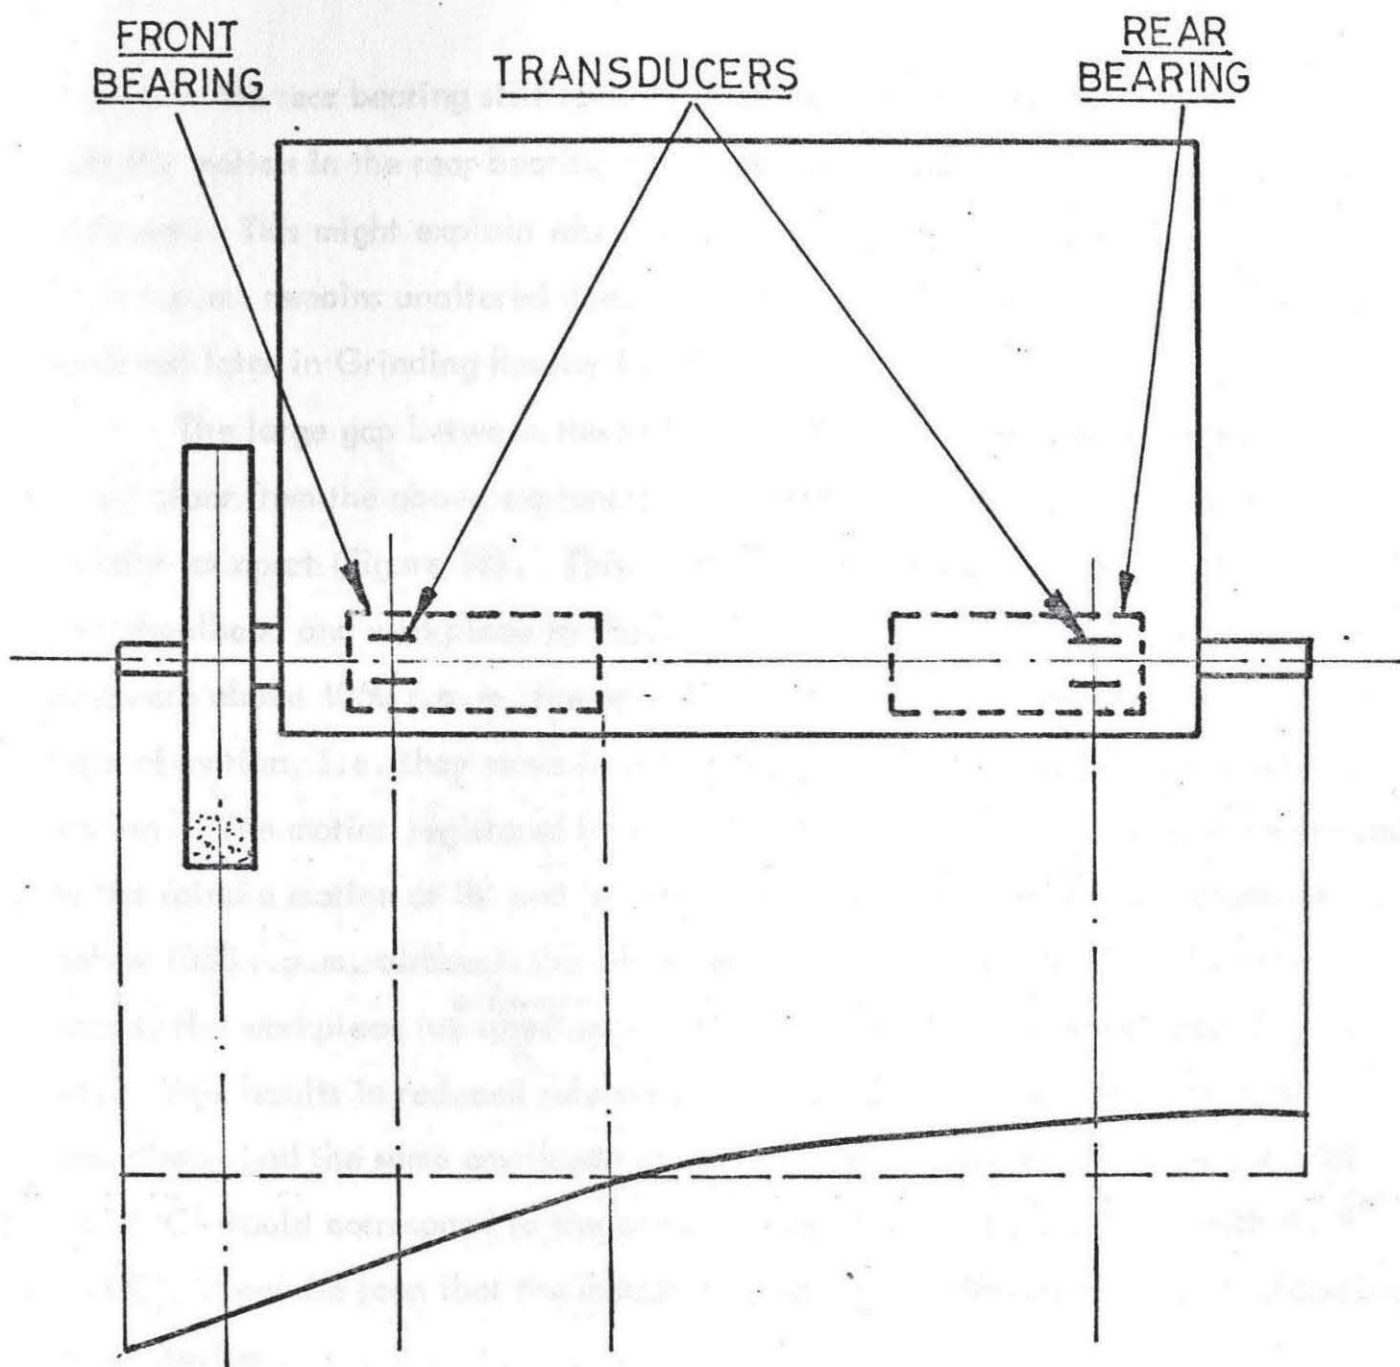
WHEEL SPINDLE POSITION INSIDE THE BEARINGS.
